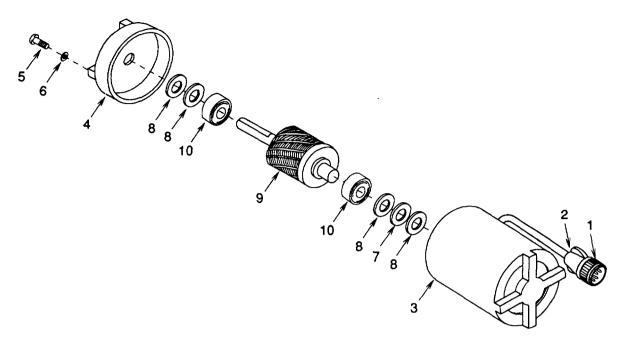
Condenser Fan Motor Assembly, IMC Magnetics Corp., Single Phase Motor, Model BC5320
